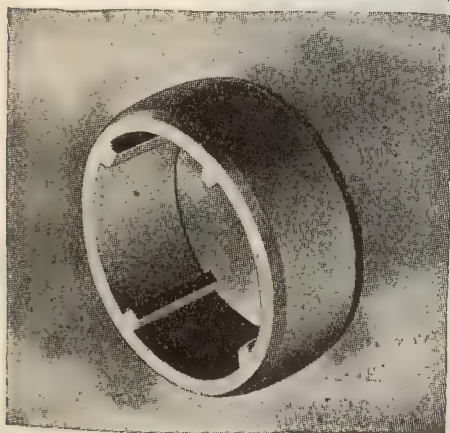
,599.—Push nipple used to join together sections of cast iron boilers. The nipple is accurately machined and has a slight taper so that when forced into the opening in the sections, by drawing the sections together by means of a rod a tight joint is obtained.
